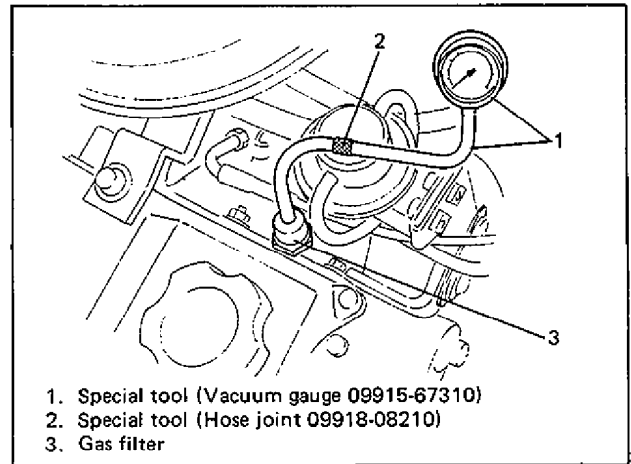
A-6-2 Installing Vacuum Gauge (for injector model with A/T)
